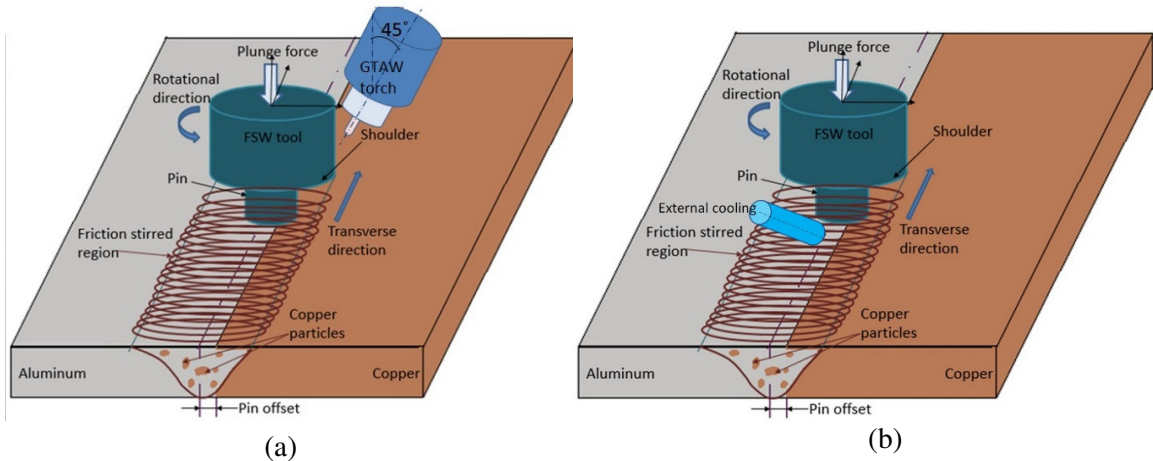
Hybrid Cu-Al FSW, (a) TIG assisted FSW and (b) external cooling enhanced FSW
